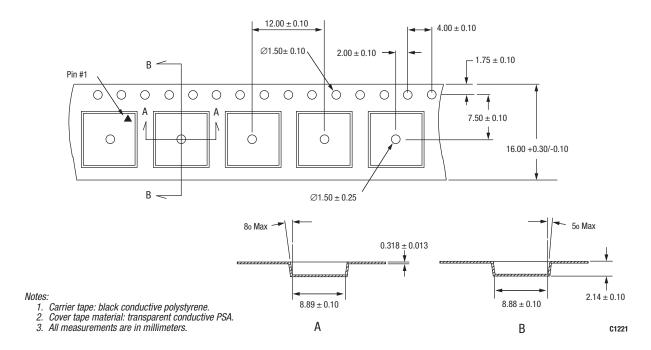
CX65105 8-Pin LCC Tape and Reel Dimensions
